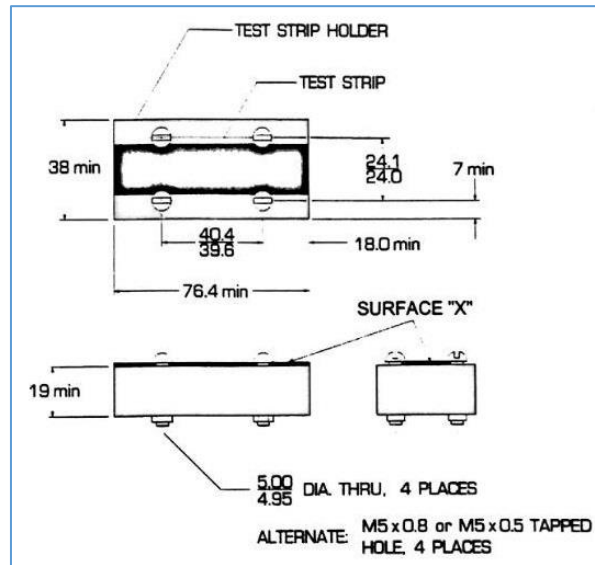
[21] – Standard condition for Almen strip holding fixture
